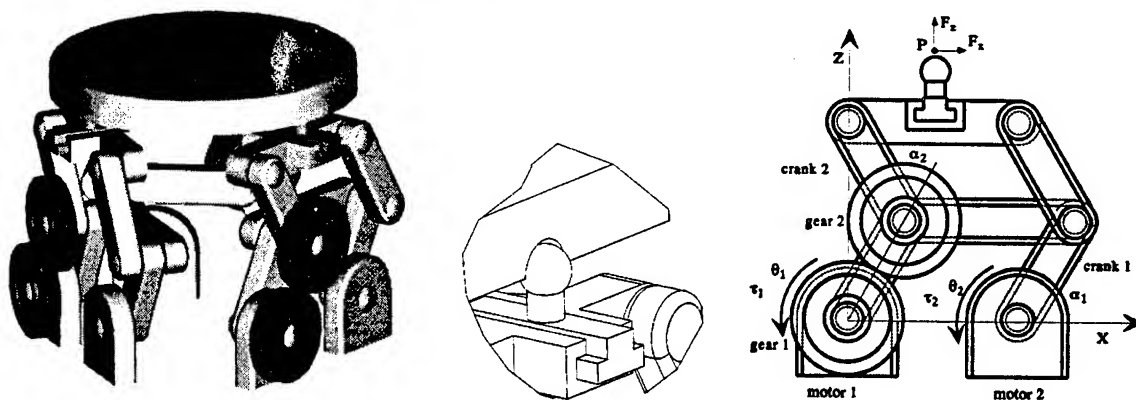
In-parallel actuated robotic fixture: (a) solid model; (b) linking of table and upper parallelogram (particular); (c) side view of one platform's driver
